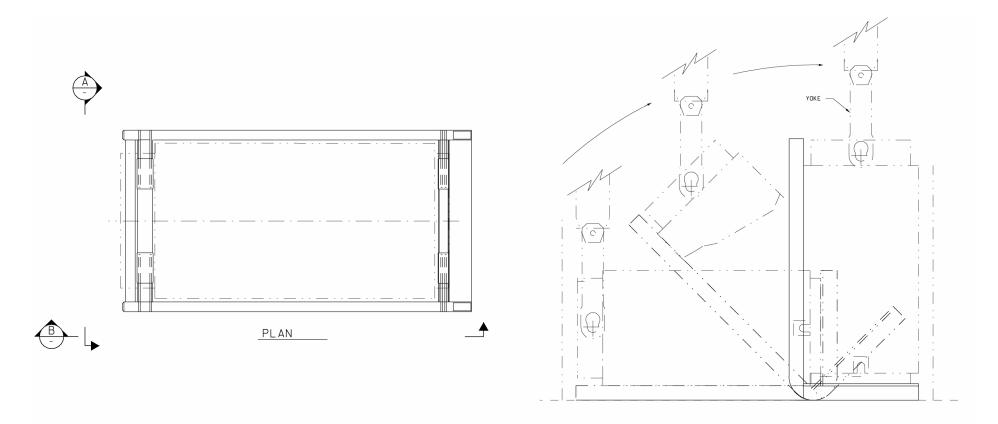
Loadout Platforms Mechanical Equipment Envelope (Sheet 2 of 2)
